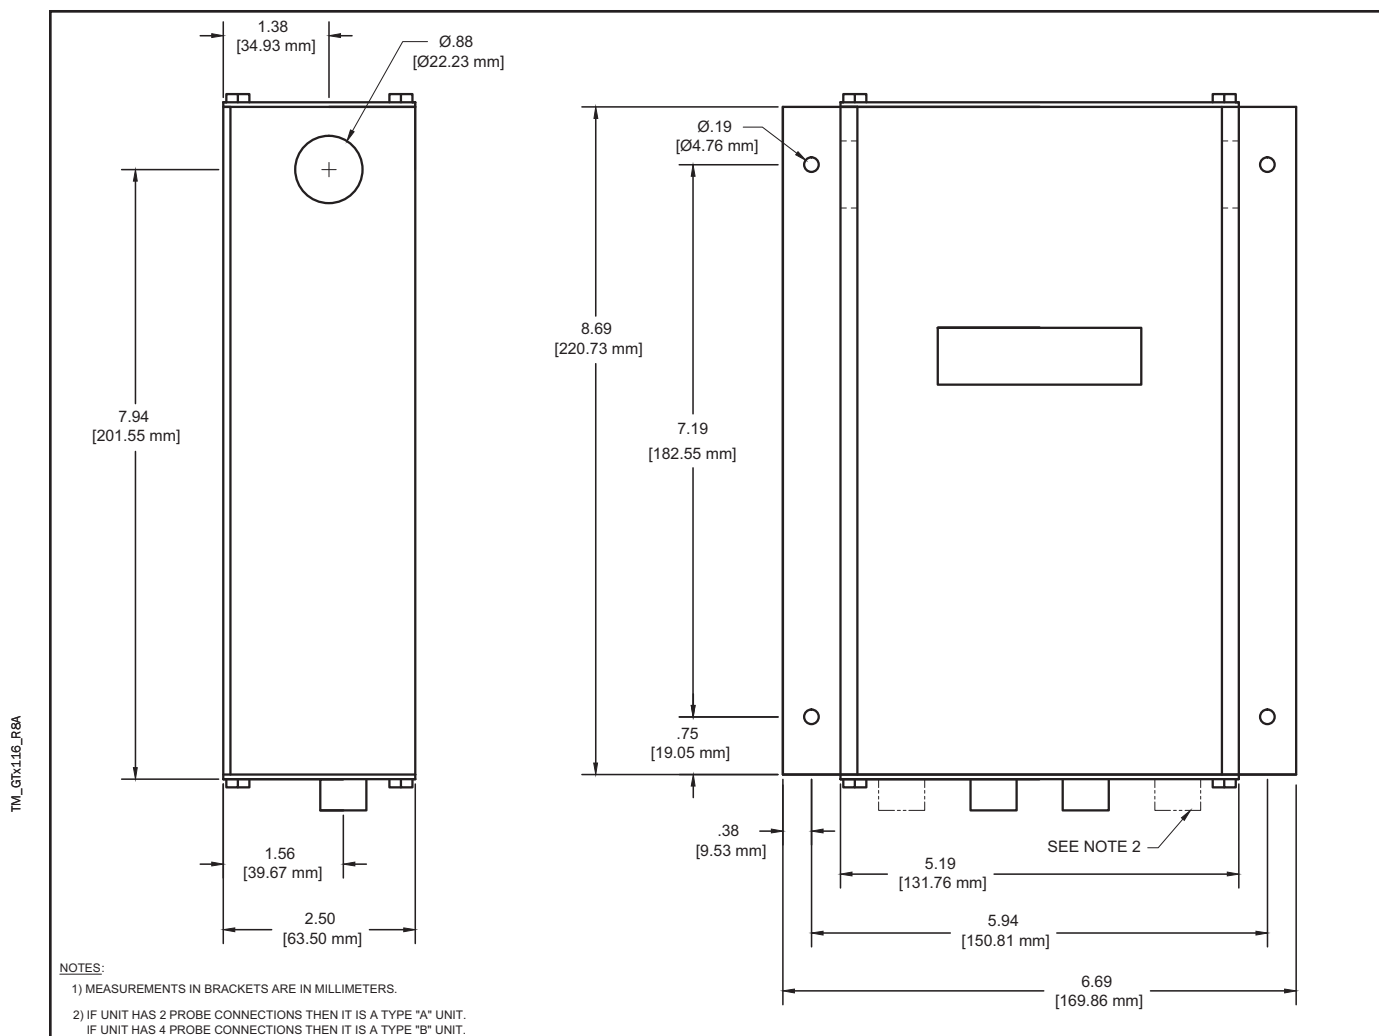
GTx116 Transmitter Mechanical Detail Drawing
